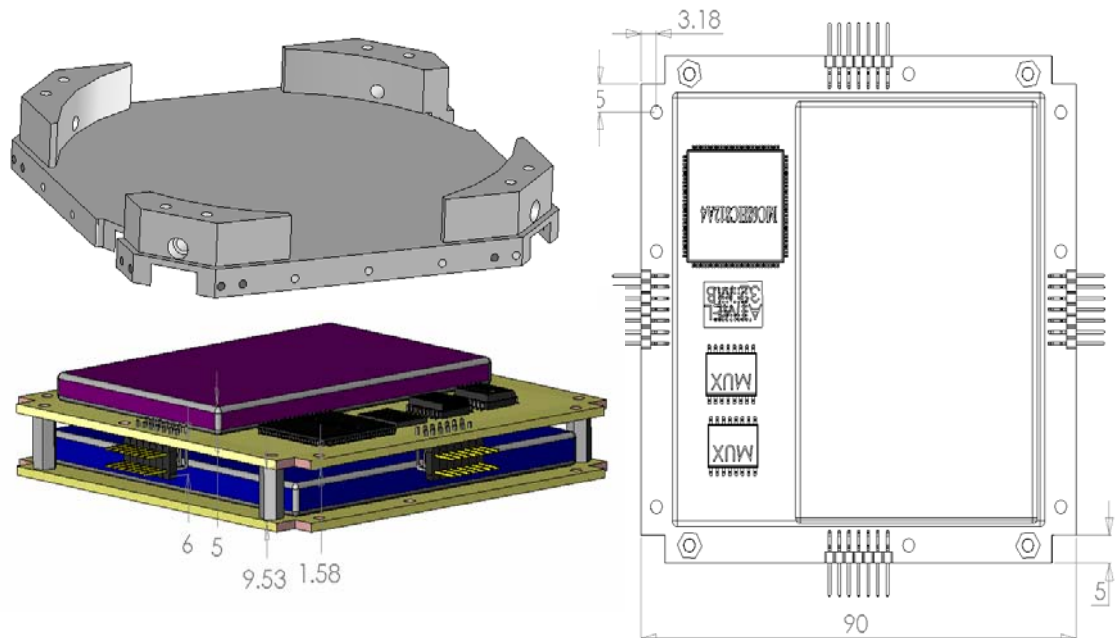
Concept Electronics Package and Tether Bracket (*dimensions in mm*)
